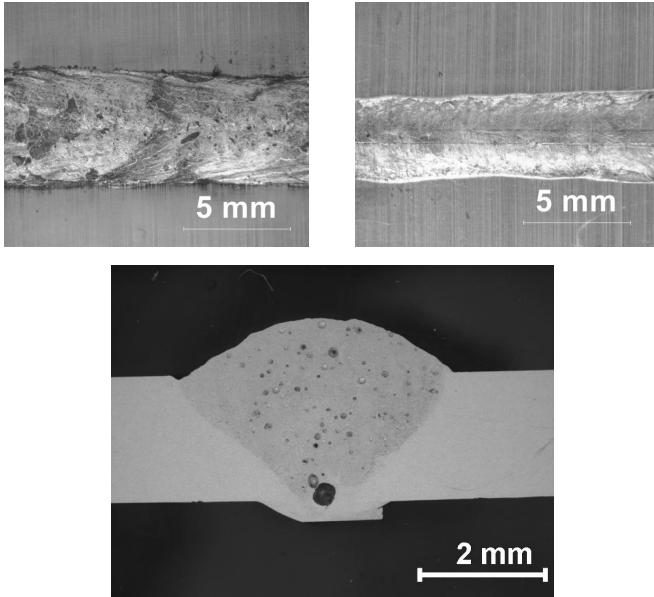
Nd:YAG laser augmented MIG weld: top and root surface photograph and cross-section macrograph; increased hydrogen porosity throughout the weld and a prominent process pore at the root (c.f. p. 164); bead on plate; EN AW-6060 (AlMgSi0.5) T66; filler Al4047 A (SG-AlSi12); $\varnothing_f = 1 \text{ mm}$; $P_{\text{Nd:YAG}} = 3 \text{ kW}$; torch distance $s = 22 \text{ mm}$; optic tilting angle $\varphi = 30^\circ$; torch angle $\alpha = 4^\circ$; argon flow 15 L min^{-1} ; $v_w = 2.5 \text{ m min}^{-1}$; $v_f = 8.0 \text{ m min}^{-1}$; $I_s = 100 \text{ A}$; $I_{\text{abs}} = 95\%$
